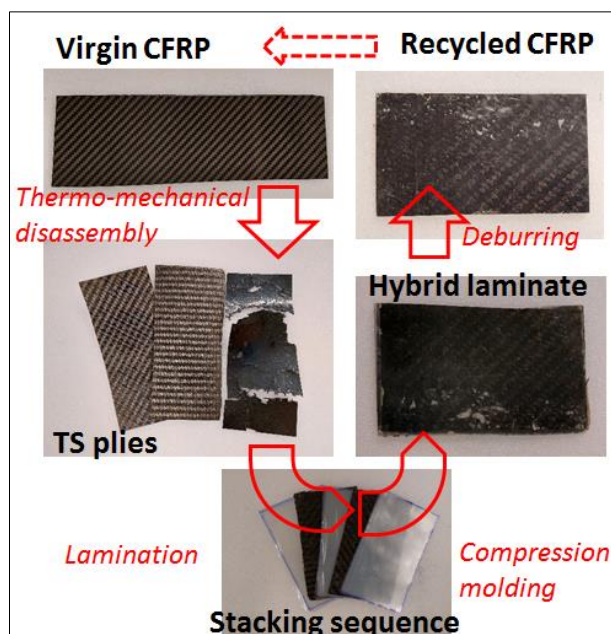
Thermo-mechanical disassembly of a composite laminate
